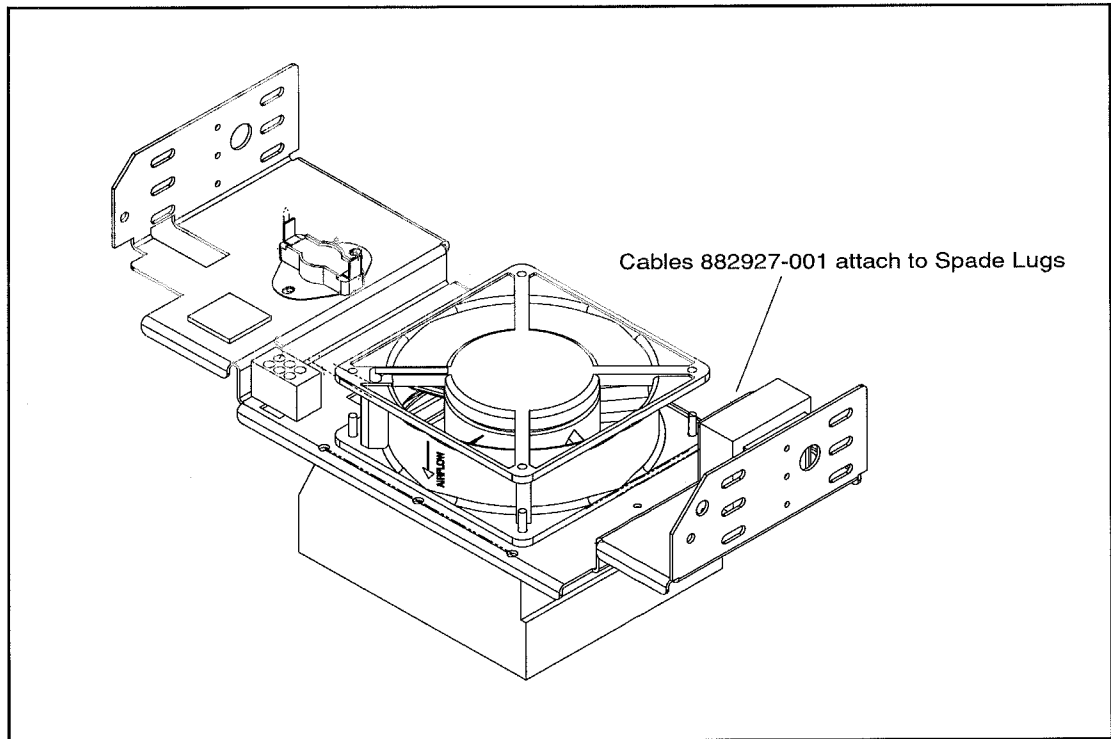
Installing Graphics Display Heater Cable Assembly
